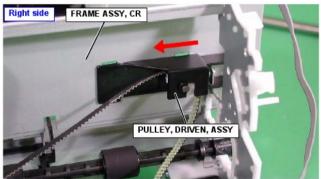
PULLEY, DRIVEN, ASSY Removal
